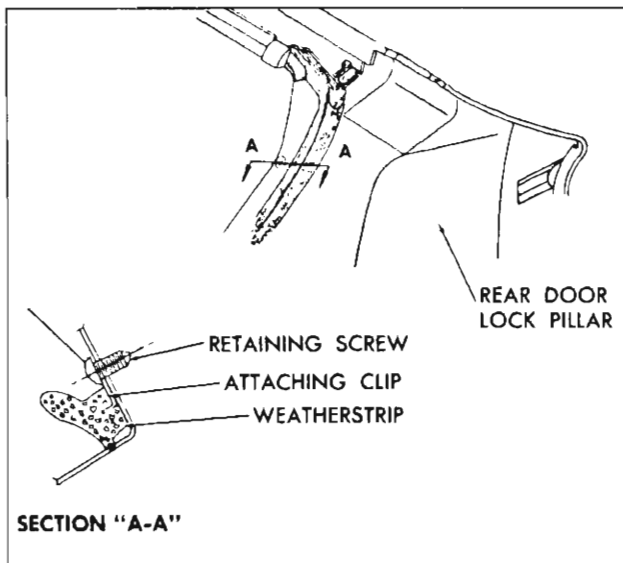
Rear Door Weatherstrip Attaching Clip Screw
